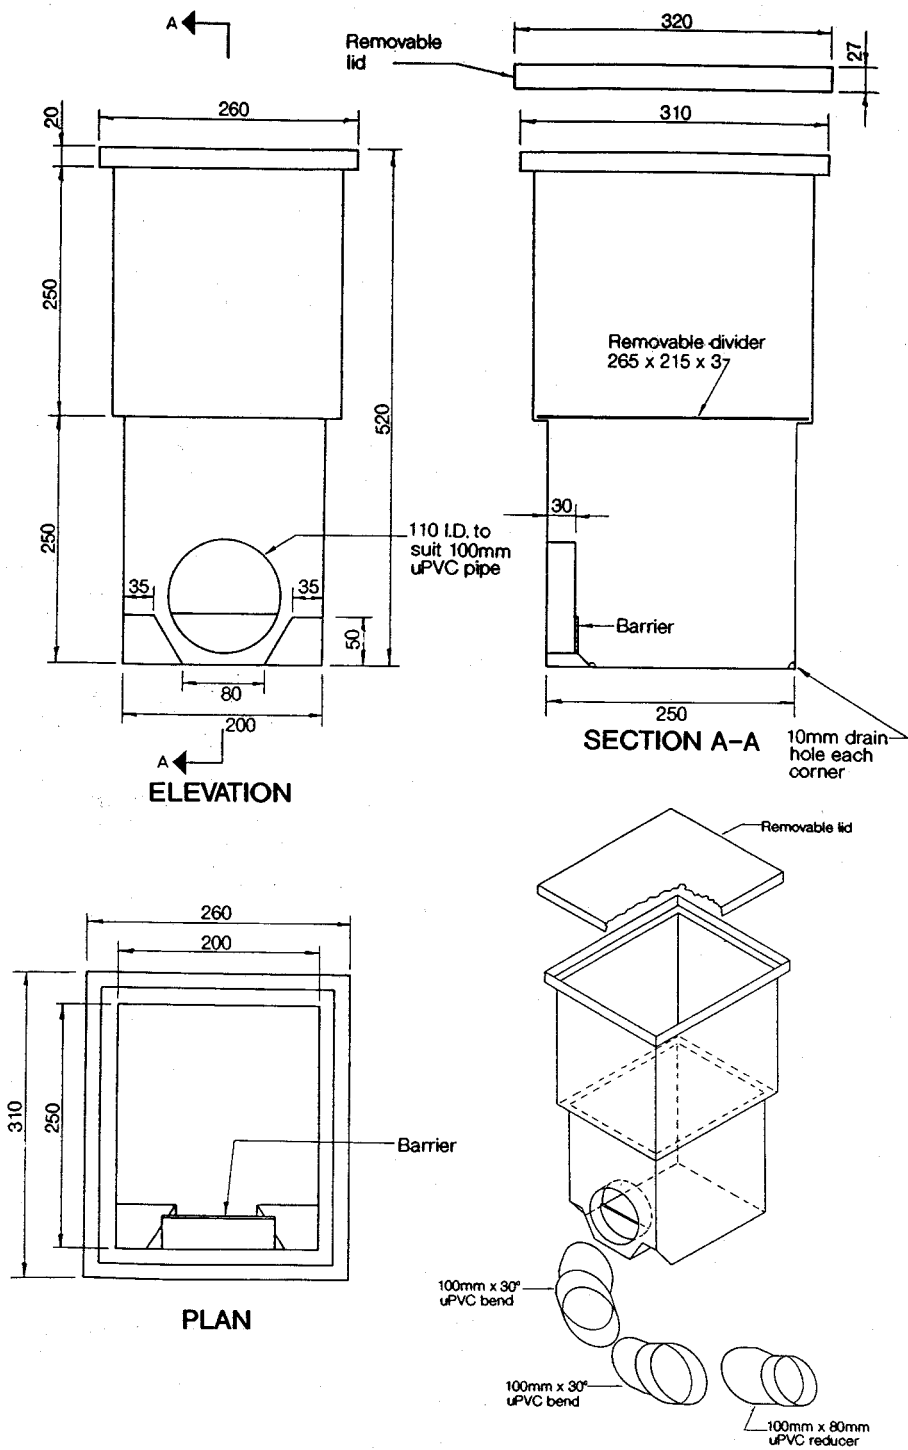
Technical drawings of the nest box showing design specification and dimensions. (Components are shown in exploded view.)
